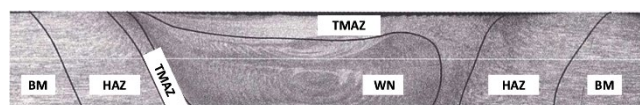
Structure of an FSW weld: a) weld zones, where: WN – weld nugget, TMAZ – thermomechanically affected zone, HAZ – heat-affected zone, BM – base material [28]
